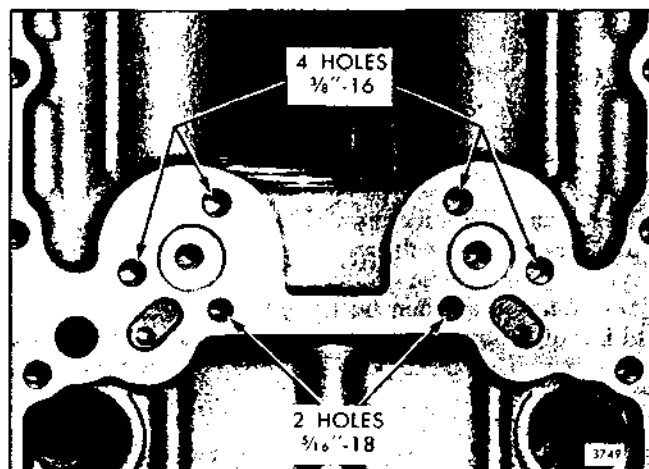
Location of the Four 3/8-16 Bolt Holes in Rear of Cylinder Block
